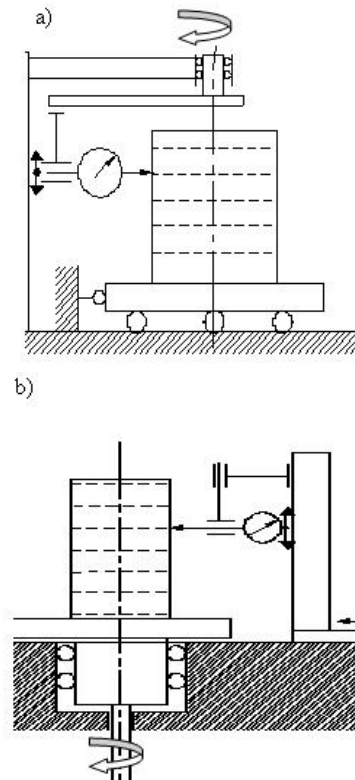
Radius change cylindricity measurements: a) using the rotary sensor; b) using the rotary table
